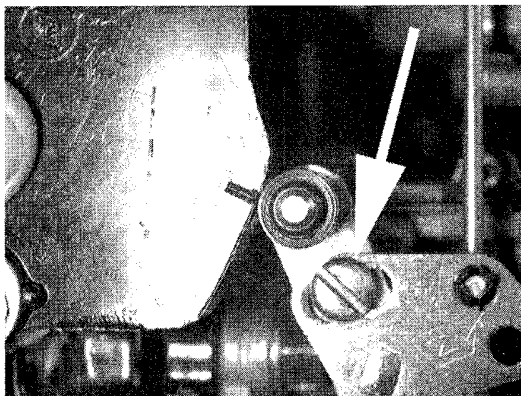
The cam follower screw is used to adjust the follower in relation to the throttle cam
